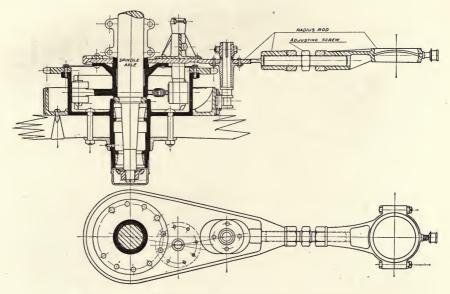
G.M.C. Radius Rod and Rear Construction.
